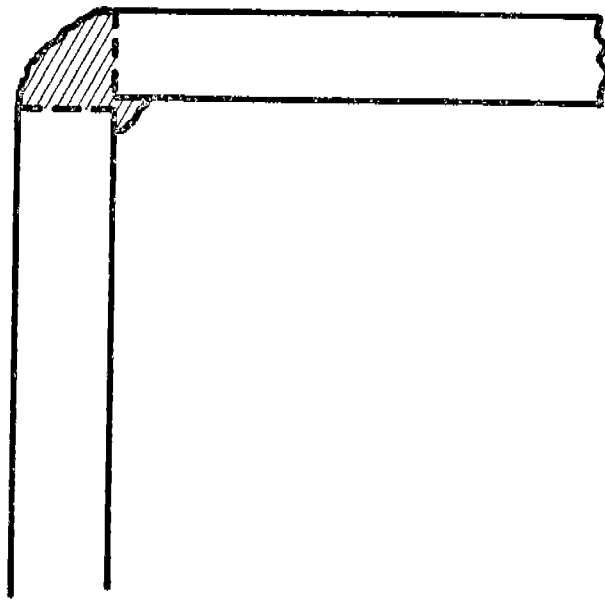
A FULL PENETRATION CORNER JOINTS DONE WITHOUT CHAMFERS
